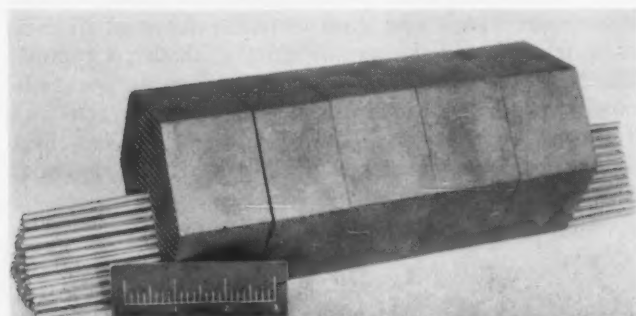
Five castings end to end with coolant tubes inserted through some of the coolant channels.
